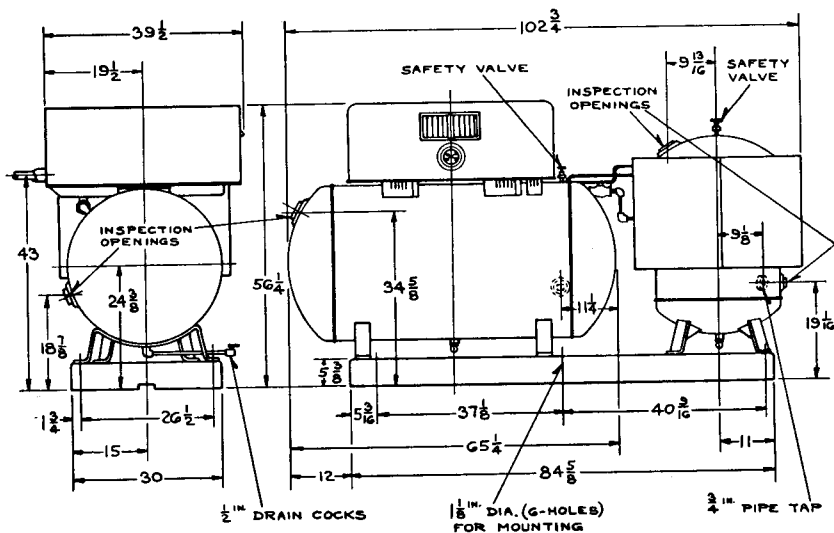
OUTLINE OF SUPPLY UNIT (TWIN COMPRESSORS)
